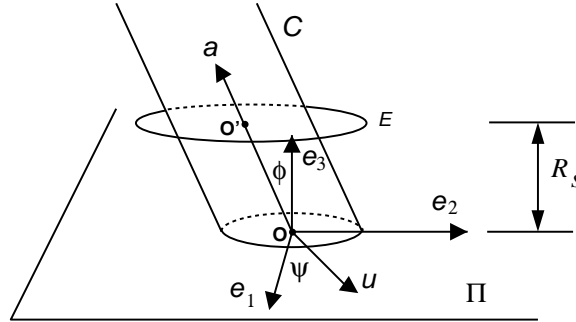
Model of milling via a spherical ball cutter (3-axis milling) or a disk cutter (5-axis).
